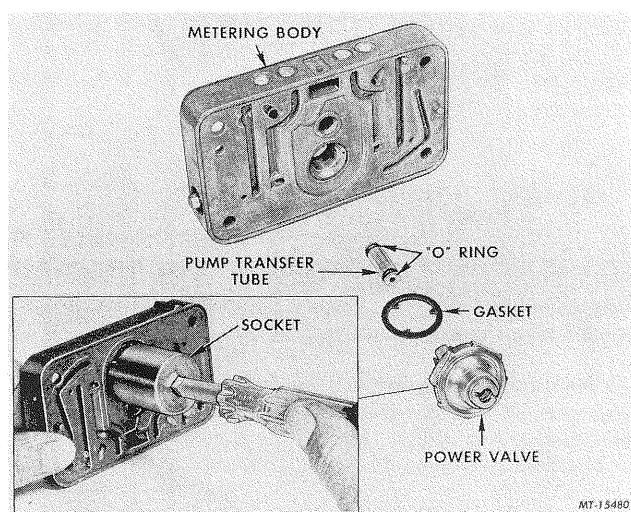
Primary Metering Body with Acceleration Pump Transfer Tube (Disassembled View)
